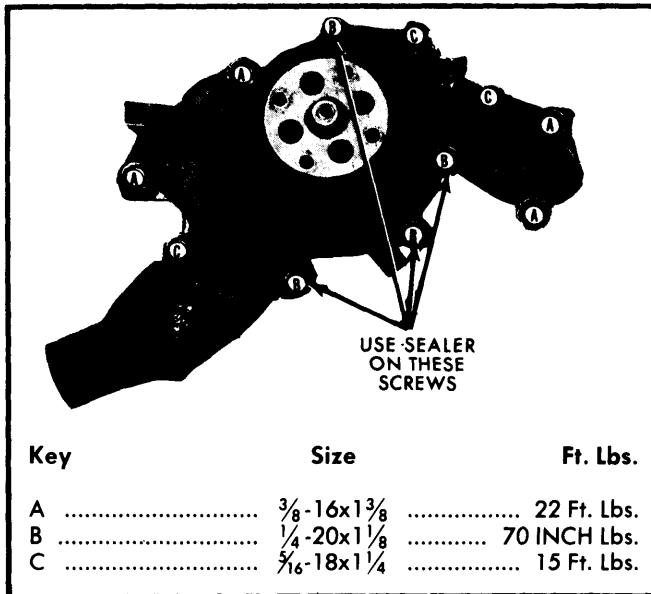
Water Pump Bolt Location (Exc. Seville)
